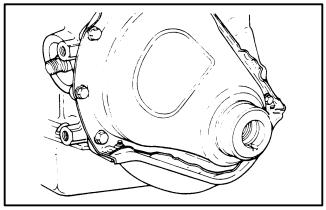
CENTERING TOOL, TIMING GEAR COVER
